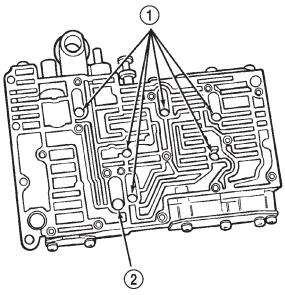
Shuttle Valve E-Clip And Secondary Spring Location
